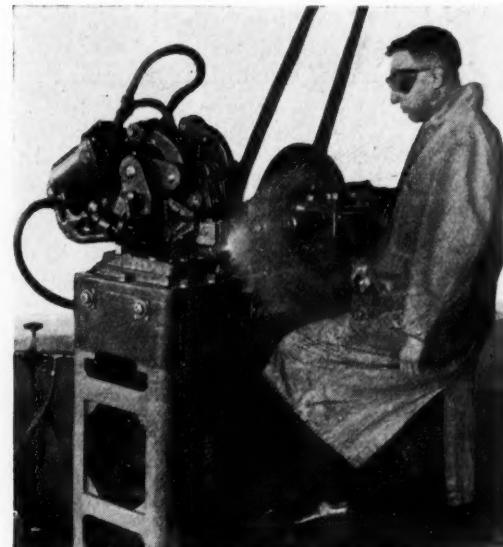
Thomson Model 25 automatic butt welder
